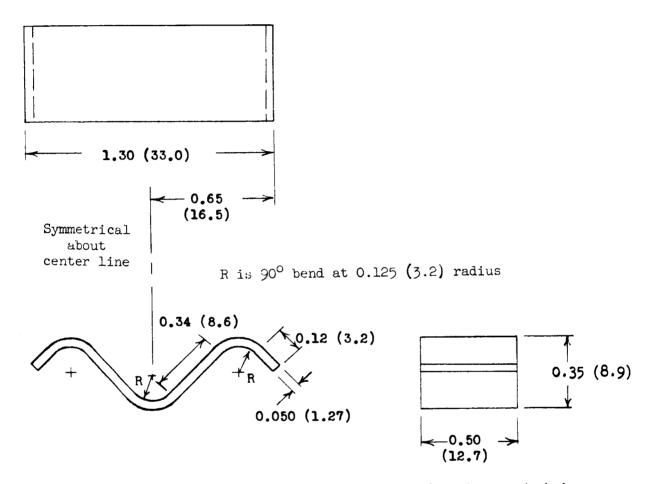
Residually stressed specimen design. Principal dimensions are in inches; dimensions in parentheses are in millimeters.
